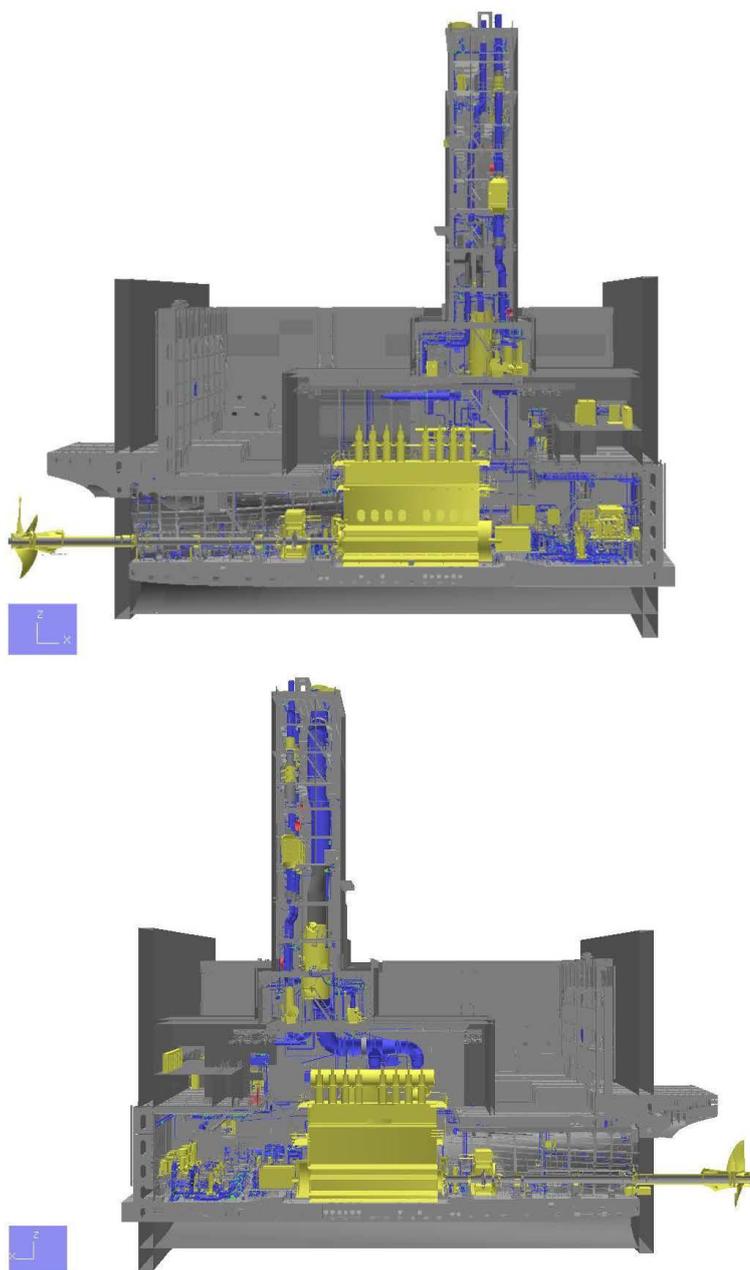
Side view of engine room geometry model, cut at $y = 0$ m. Upper: looking to port; lower: looking to starboard.
